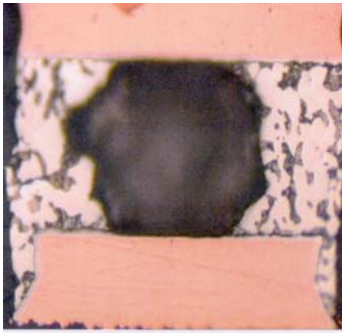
Void in Solder Joint. OSP PCB, SnPb component, SnPb Paste.
